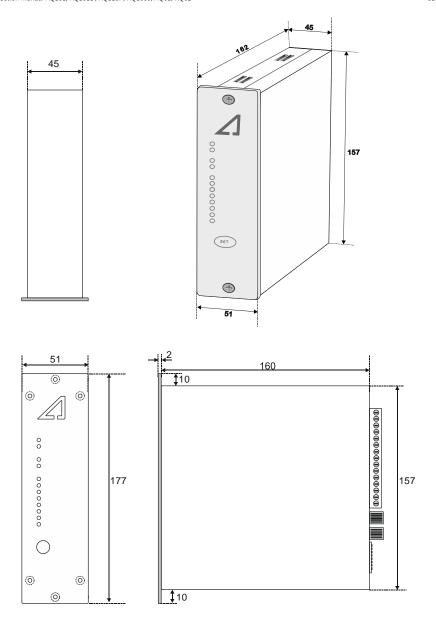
AQ101 device dimensions, all dimensions in millimeters.
